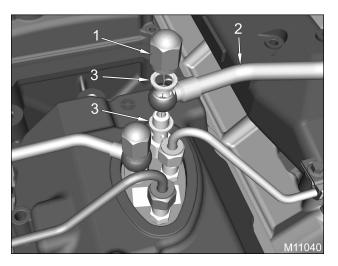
Injector return tube assembly, bonded seal washers, and banjo bolts
